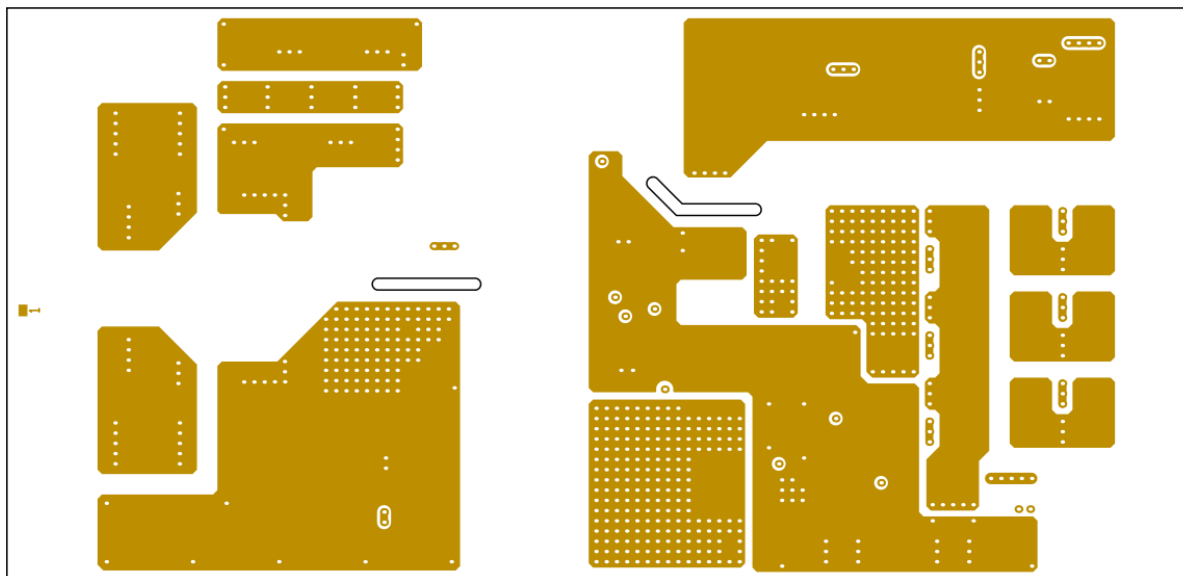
DER-1030Q Mid-Layer 2 PCB Layout.
